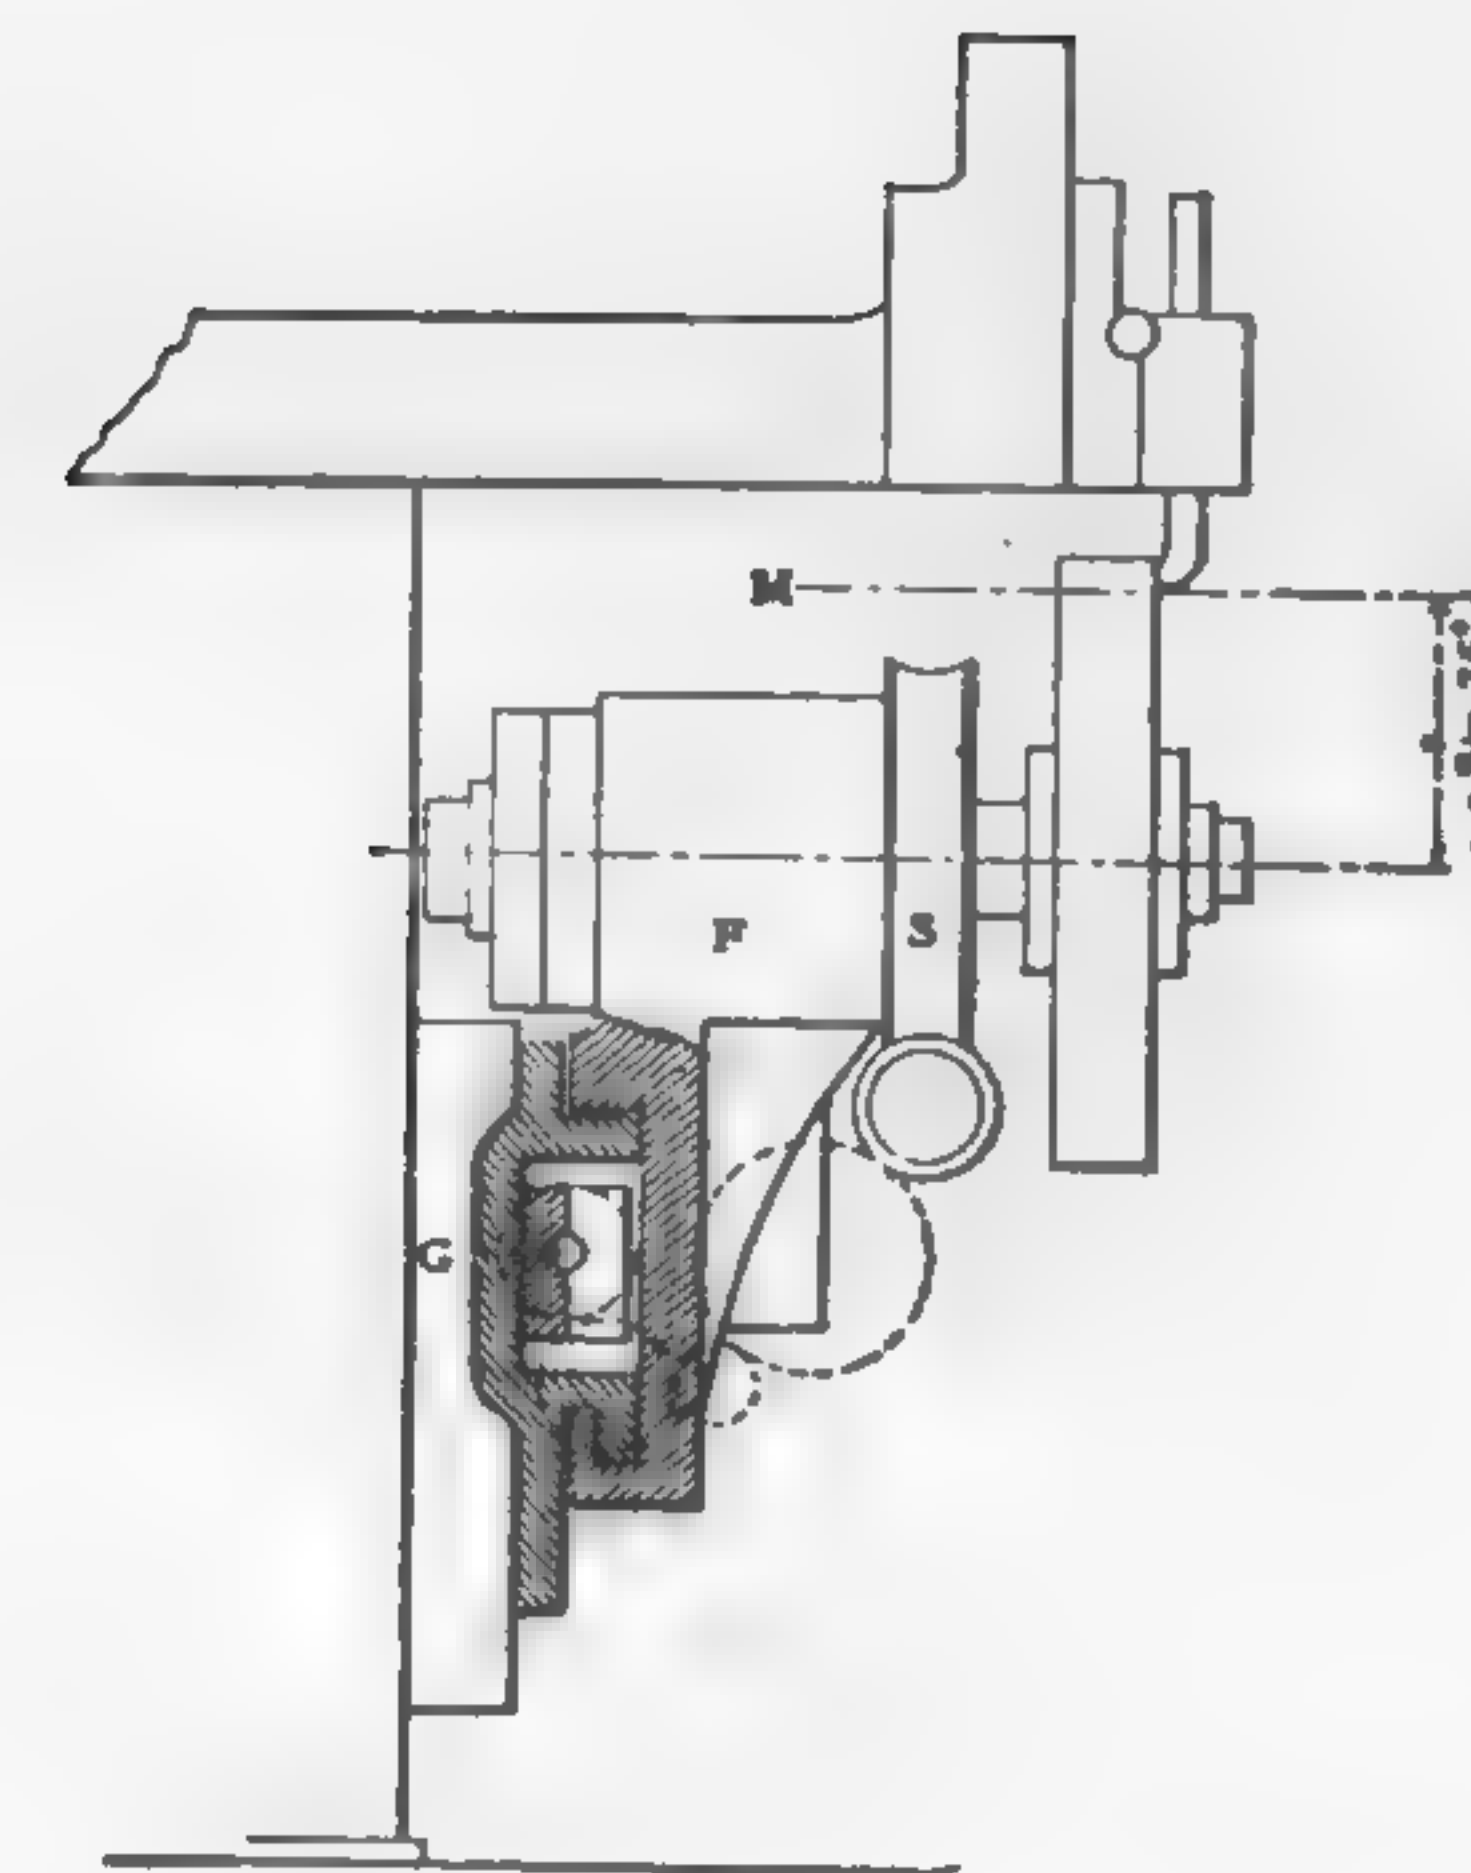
B. HERRMANN'S SHAPER FOR INVOLUTE TEETH, 1877 (*American Machinist*)
